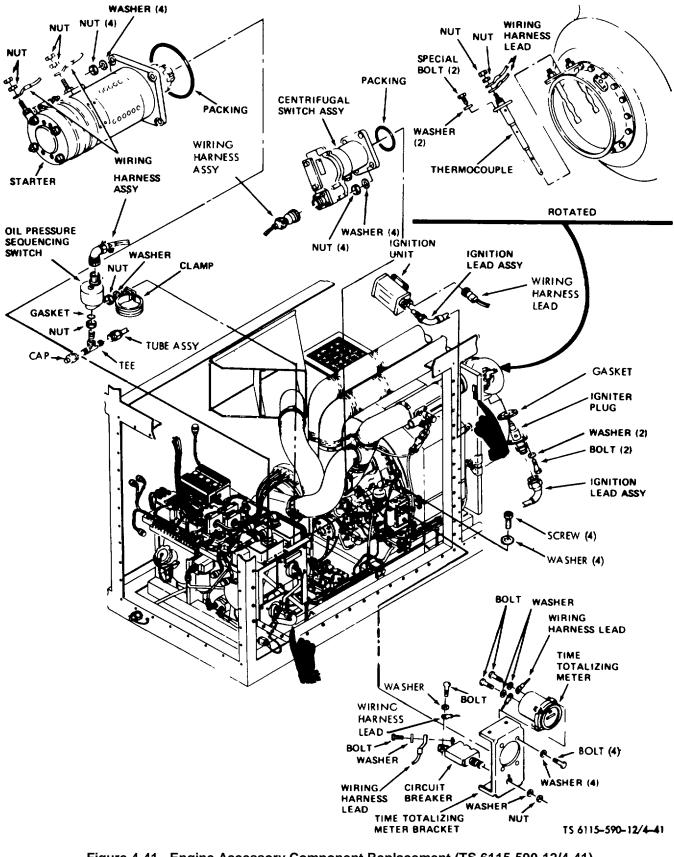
Engine Accessory Component Replacement (TS 6115-590-12/4-41) Change 6 4-91
